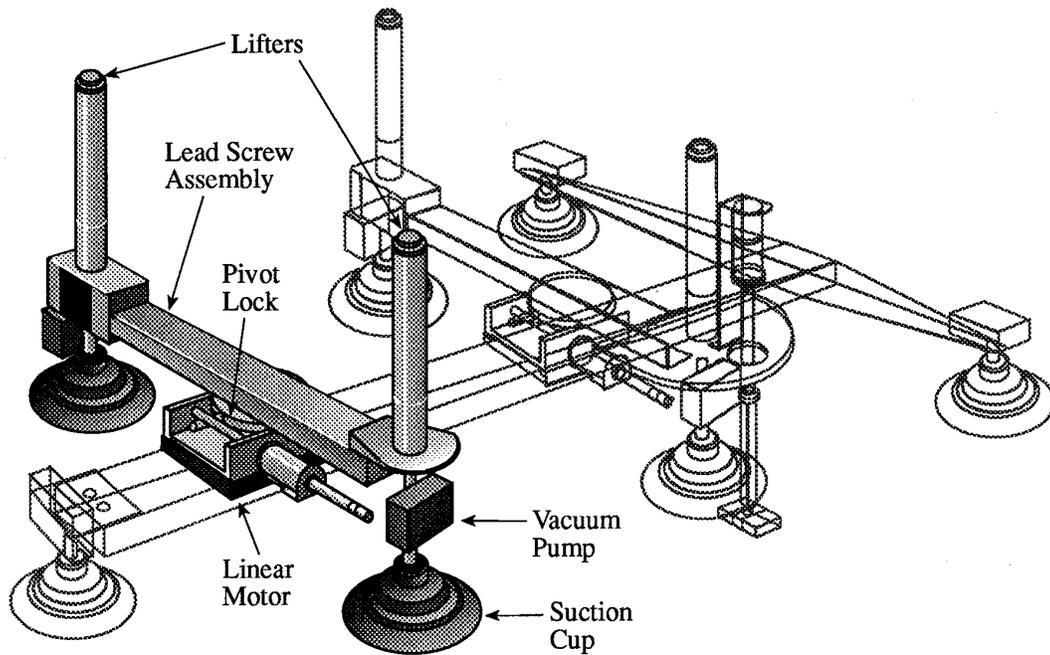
DRAWING OF THE STABILIZER BRIDGE
